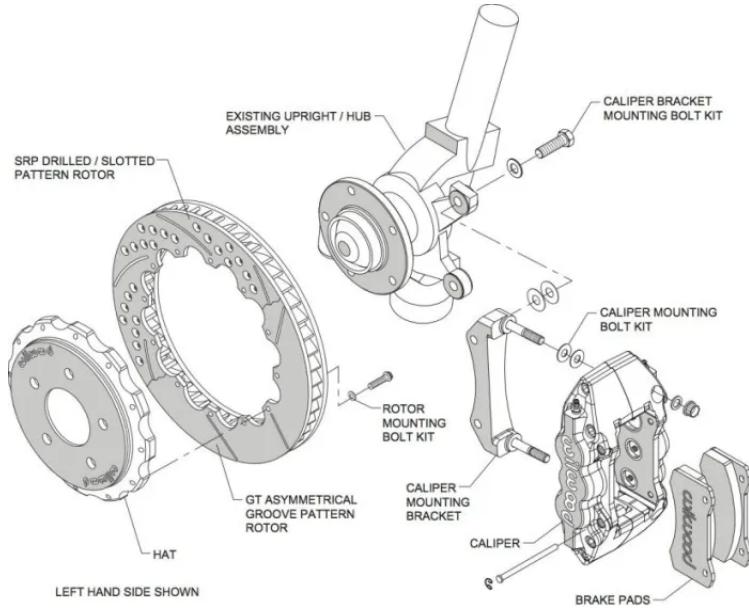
Assembly of a Fixed Caliper mounted to the upright assembly [25]
